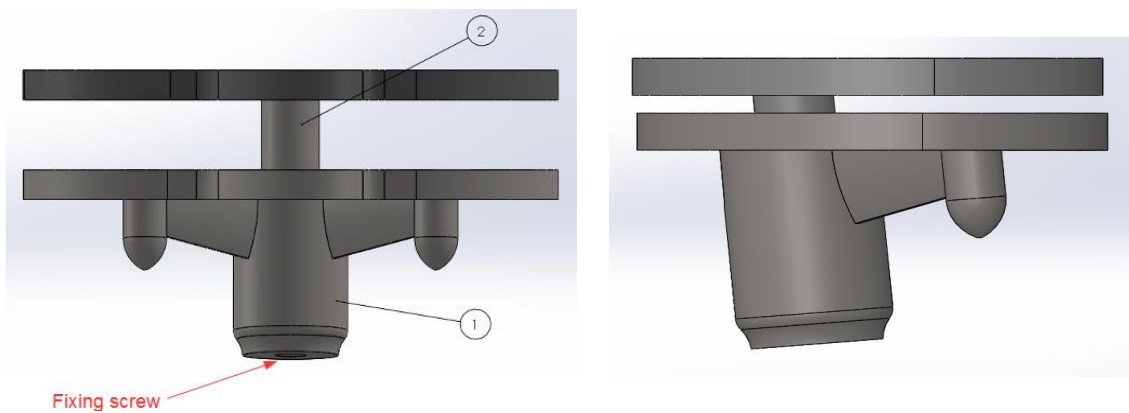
First CAD design of the tibial tray (assembly) in a frontal view (left) and in a lateral view (right).
